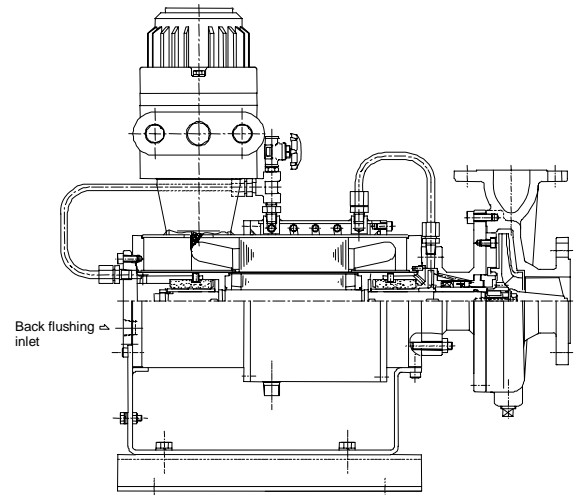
Slurry handling type with a mechanical seal (M type)
